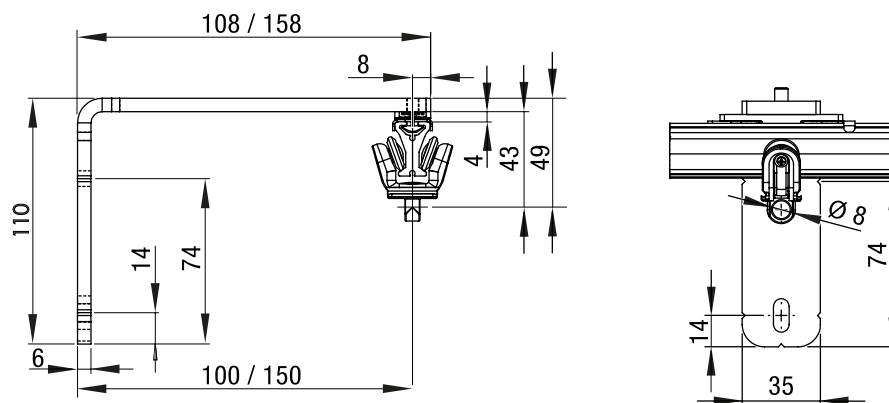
Interior wall mount bracket with ceiling mounting plate – Installation dimensions
